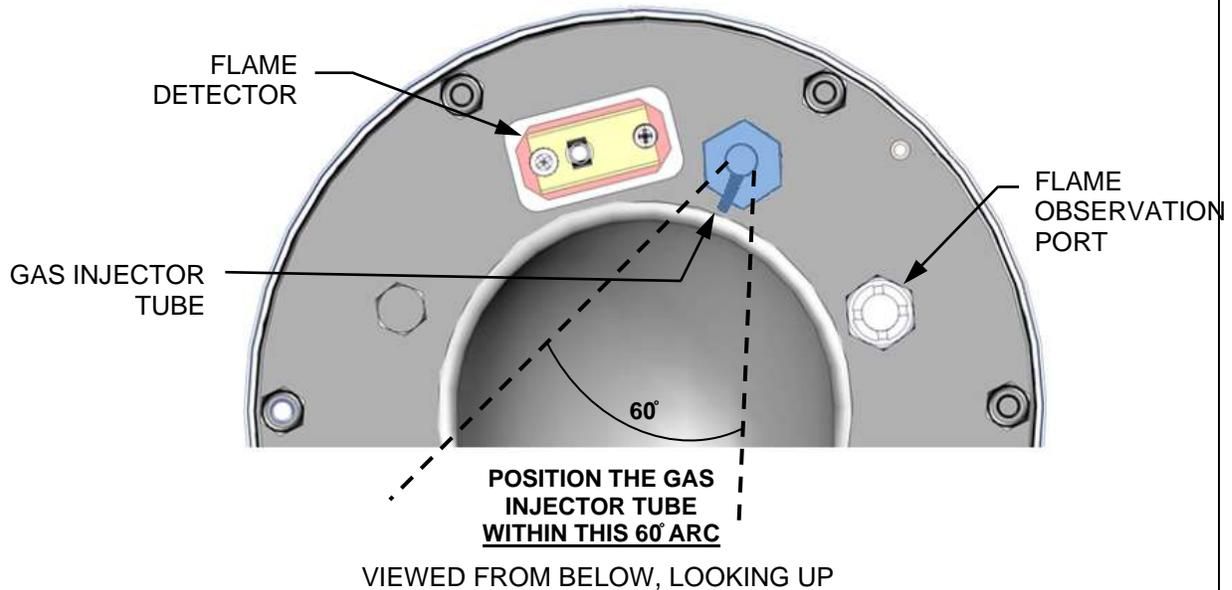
Intake Manifold with Igniter-Injector & Flame Detector
